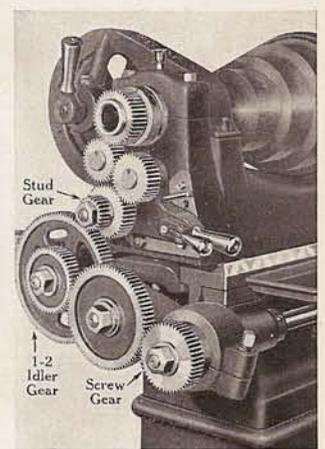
Change Gear Equipment Used on Standard Change Gear Lathes.
